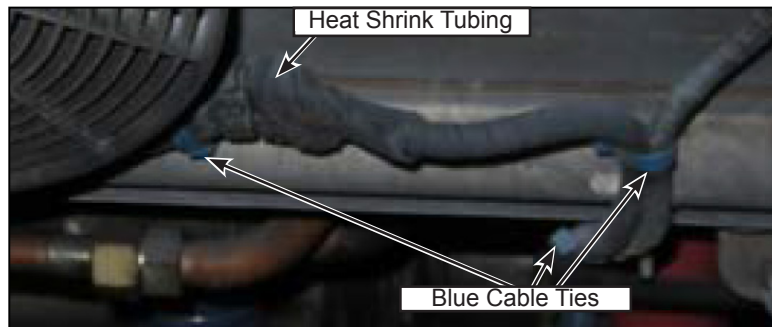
Cut Cable Ties at Delphi Connectors and on Harness Side Wiring and Remove Heat Shrink Tubing on Delphi Connectors
